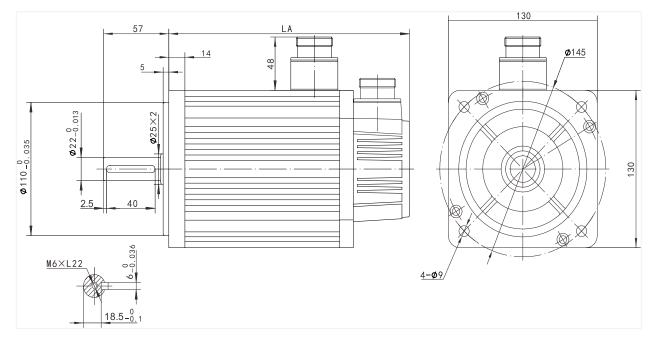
Installation dimension of WE series 130 flange servo motor
